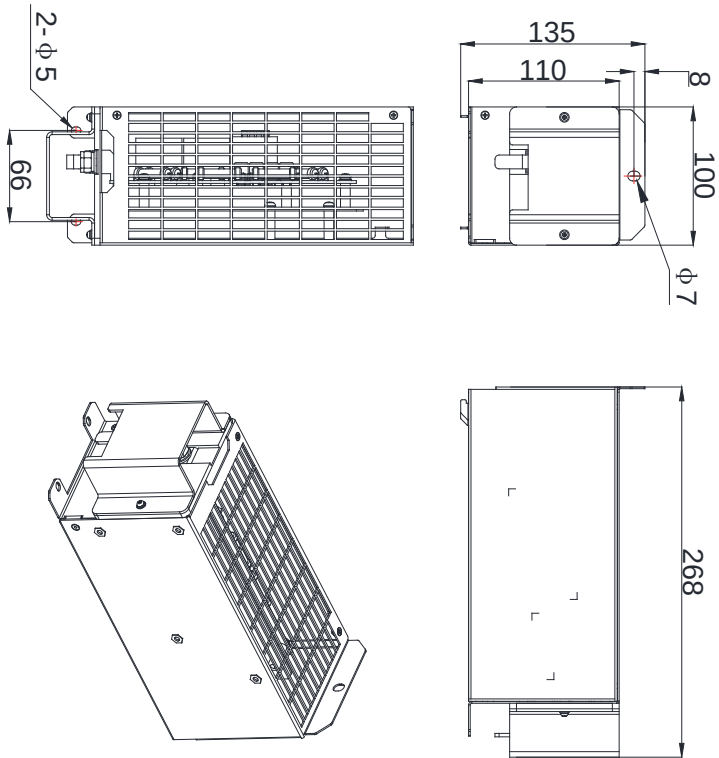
HST-1001, HST-1002 and HST-1003 Dimensions
